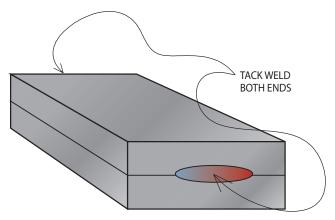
Make tack welds at the ends of the joint.
